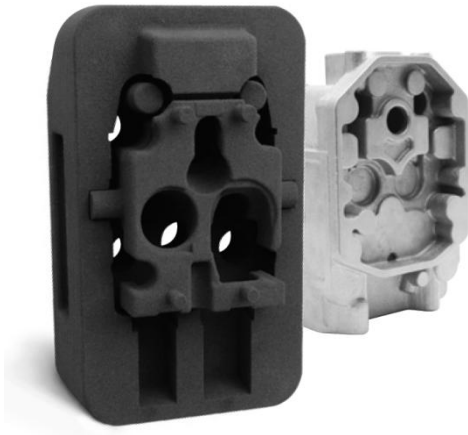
Complex 3D printing by sand casting of mould and cores produced by 3D printing.
